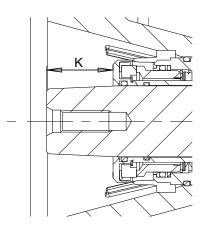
Reference dimension "K" from shaft end to mechanical seal
